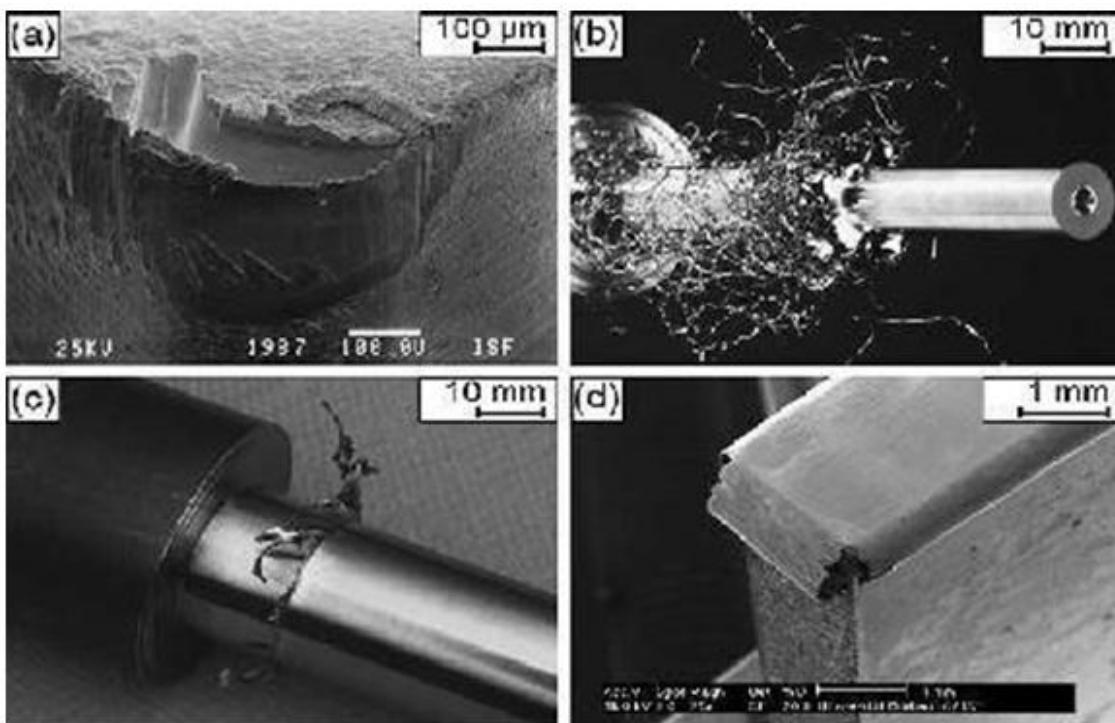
Difficulties occurred during conventional machining of Ti-Ni alloy a) High tool wear b) Adverse chips c) Burr formation after machine in grinding
